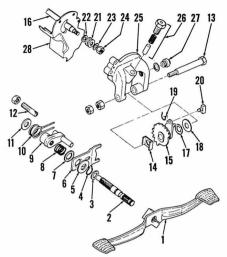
Exploded view of YG-1 shift assembly. Other models are similar. The complete shift rod (16) is also shown in Figs. Y1-24 and Y1-27.
